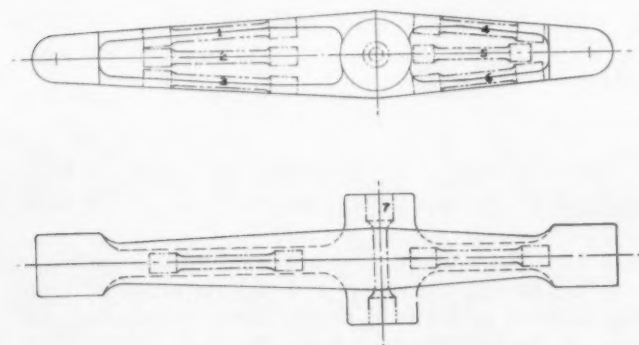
Sketch of "lever" casting showing location of test bars cut from it for physical testing. Casting is 10-3/4 in. long. Results of tests are as follows:
